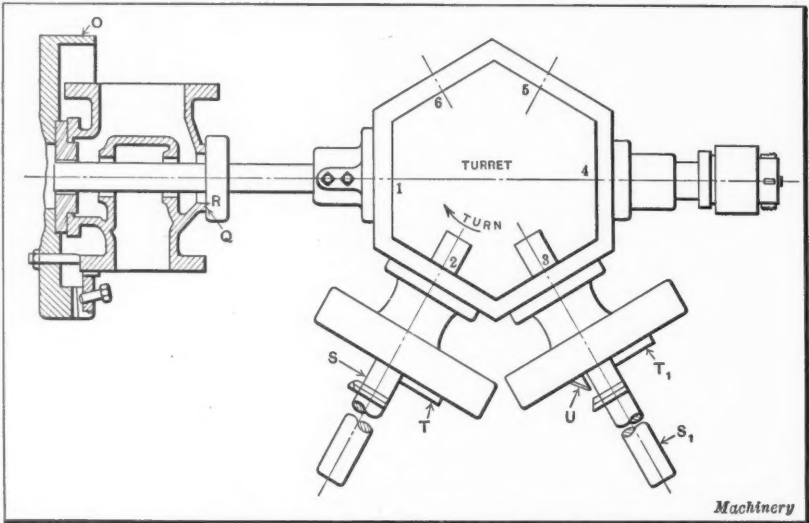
Tooling Equipment used for Second Chucking on the Valve Body
